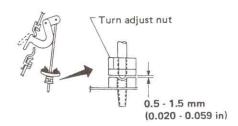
Rear door exterior handle link rod adjustment (Sec 10)
